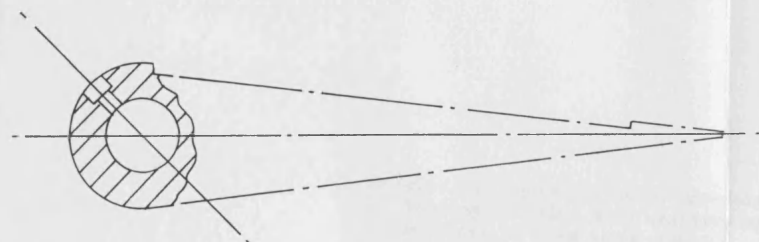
Details of internal machining of control surface (refer to figs.3.11,3.12 for details of sections).
